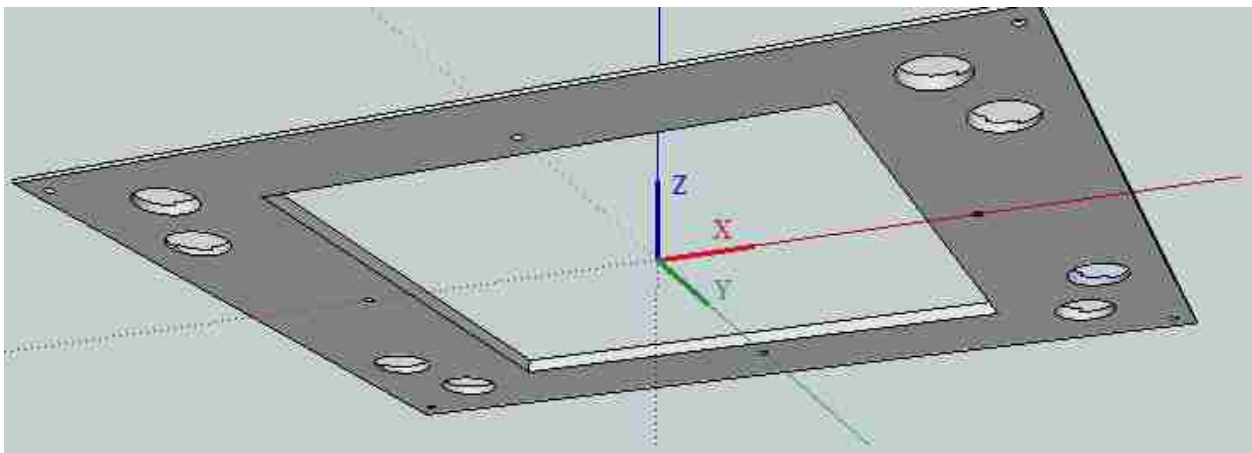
Bottom orthogonal view of the 20x20 cm² upper trimmer lead plate.
